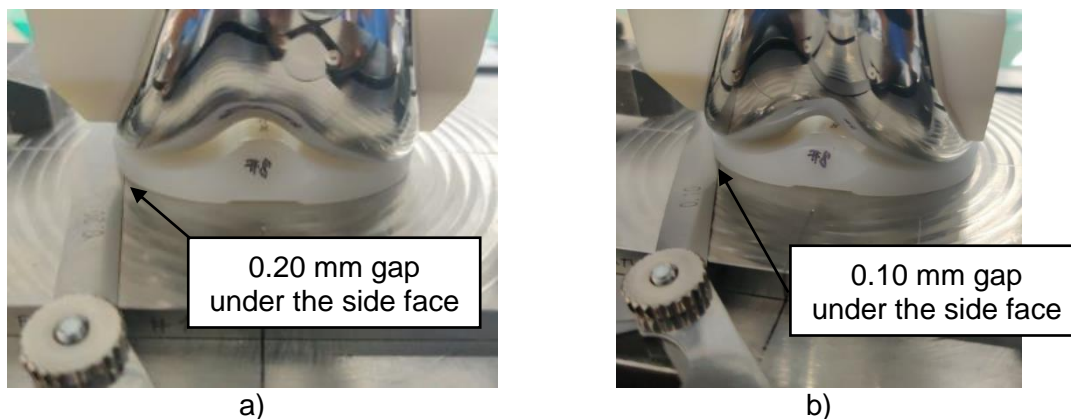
Feeler gauge measurements at the gap between the top surface of the metal tray fixture and the bottom surface of the tibial insert side wall, showed gap size of a) 0.20 mm when loaded with 10 N and c) 0.10 mm when loaded with 5480 N.
